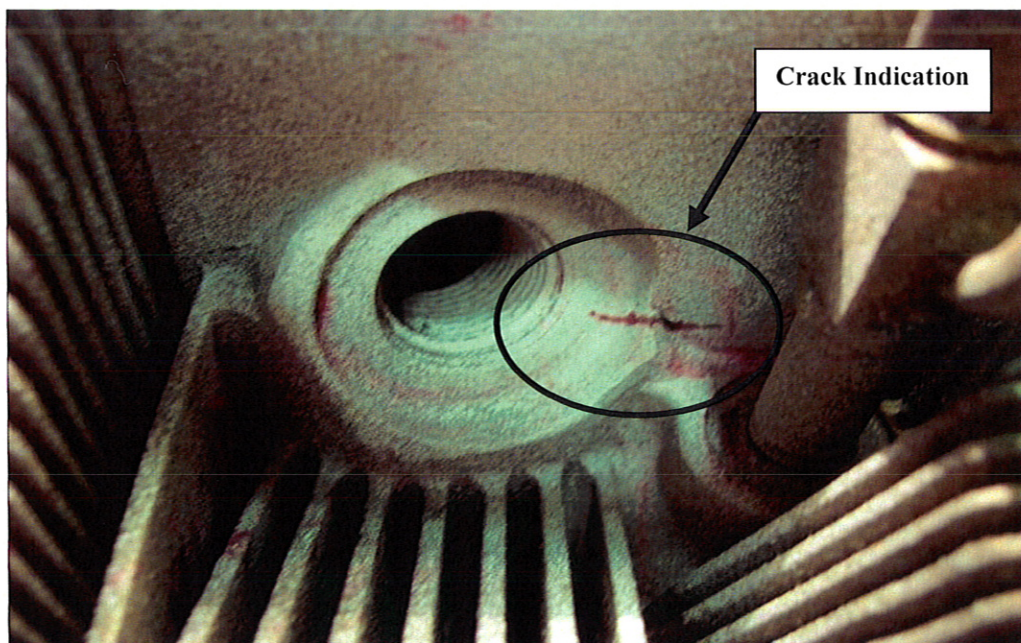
Cylinder Head Crack Indication with Dye Penetrant
